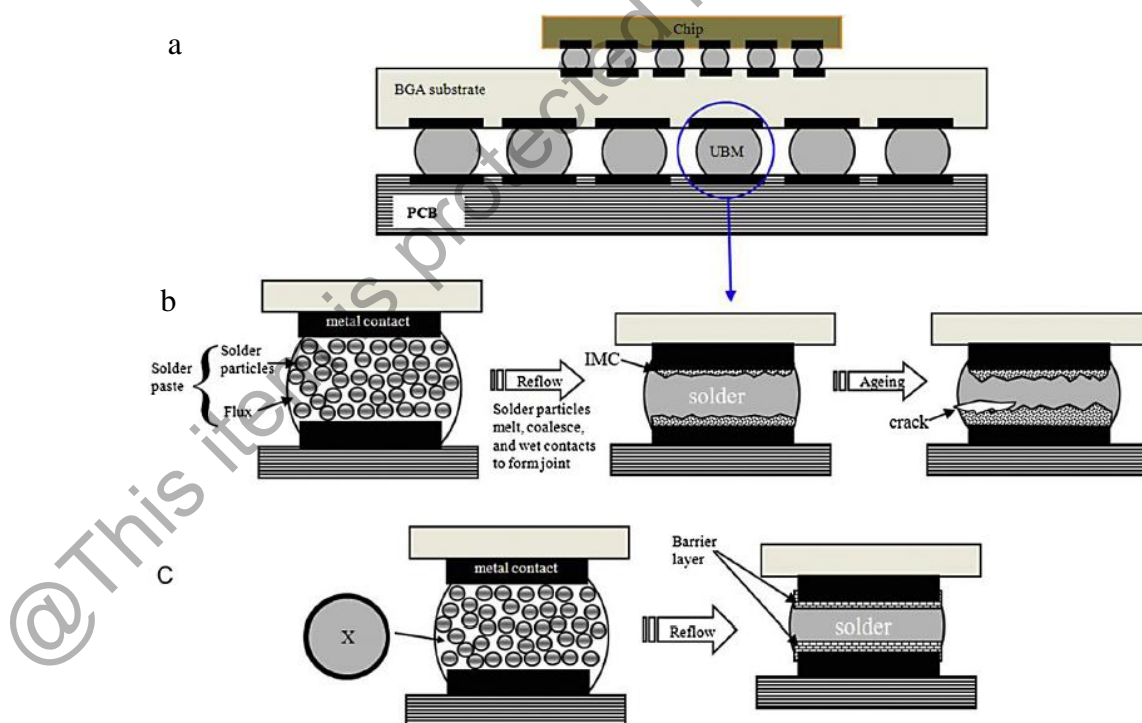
A schematic drawing showing: (a) flip-chip solder joints, (b) solder joint formation and failure, and (c) formation of barrier layer after addition of elements (X). (Kotadia et al., 2014)
